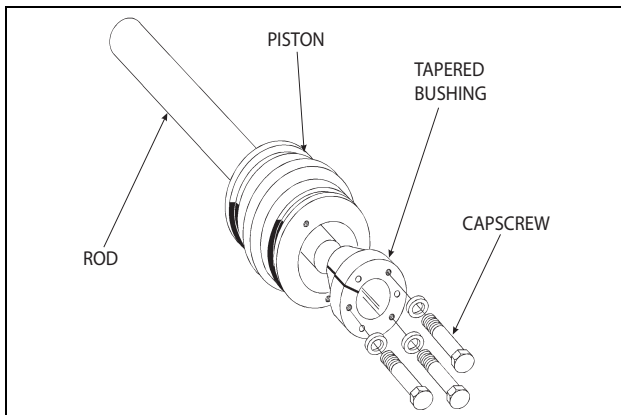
Jib Lift Cylinder (SN 0300245051 through 0300245146)
